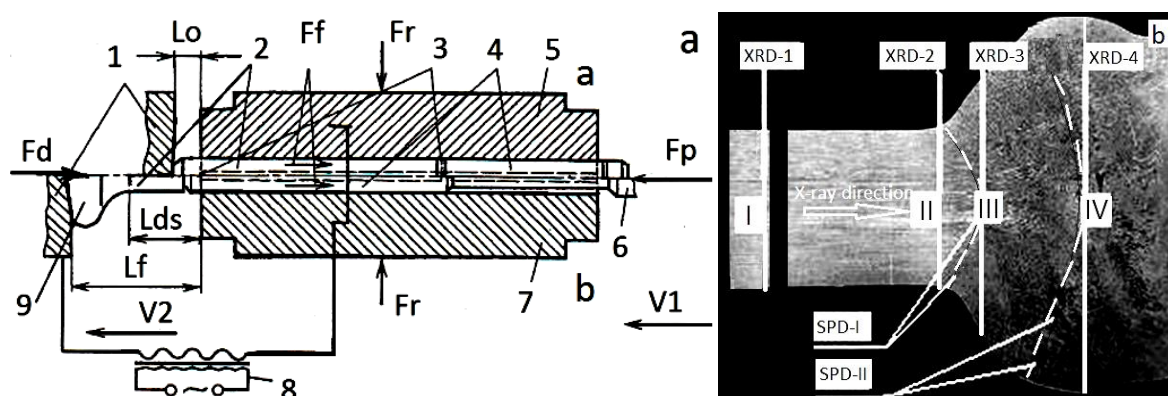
Scheme of a continuously consistent method [17, 18] for HPC blades preform manufacturing according to proposed EUF process. Designations (in Fig. 1, a): a - initial stage (hight) of EUF process; b- end stage (lower) of EUF process; (c) L_o – initial distance between electrodes, L_{ds} – distance of deformation starting at heating, L_f – final distance between electrodes; (d) F_f – friction force, F_r – radial loding force for pressure of radial electrodes to sample, F_p – pressure load, F_d – deformation load; (e) V_1 – punch rate of
